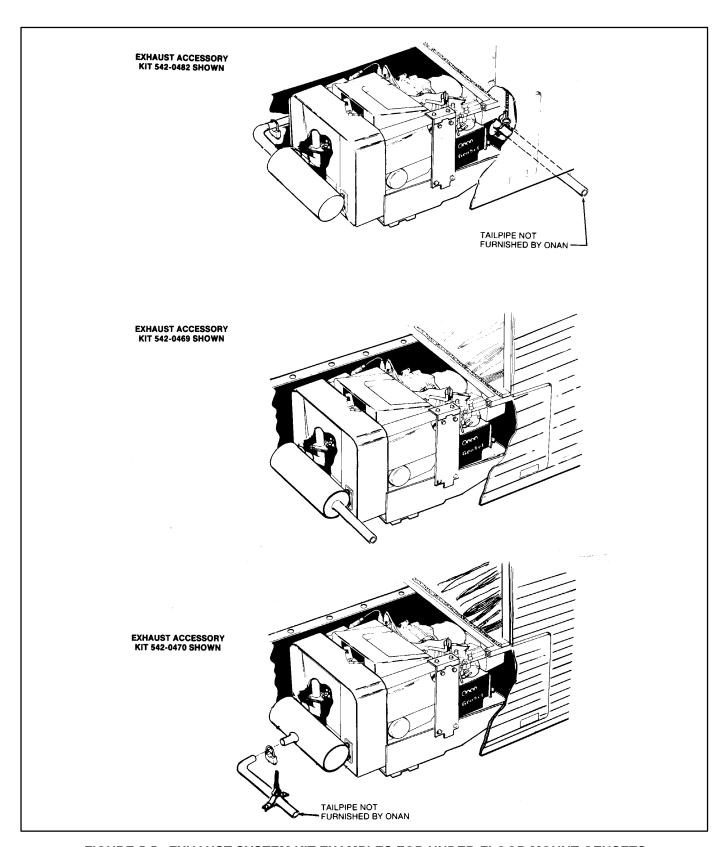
EXHAUST SYSTEM KIT EXAMPLES FOR UNDER-FLOOR MOUNT GENSETS
